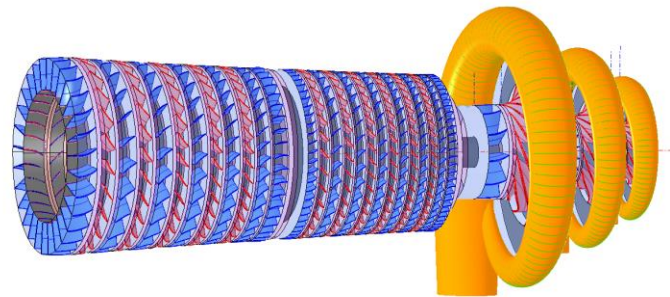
MULTISTAGE AXIAL-CENTRIFUGAL COMPRESSOR, DESIGN 2
